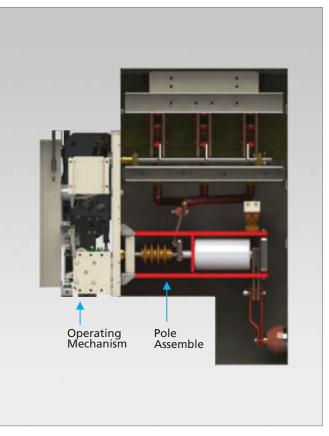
b - Side View of The Vacuum Circuit Breaker
